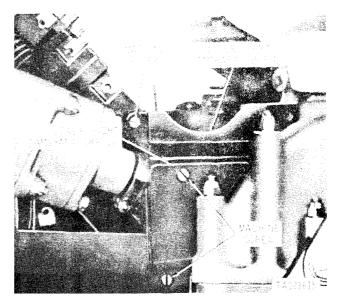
Removing or installing camshaft drive shrouds - fight side.
